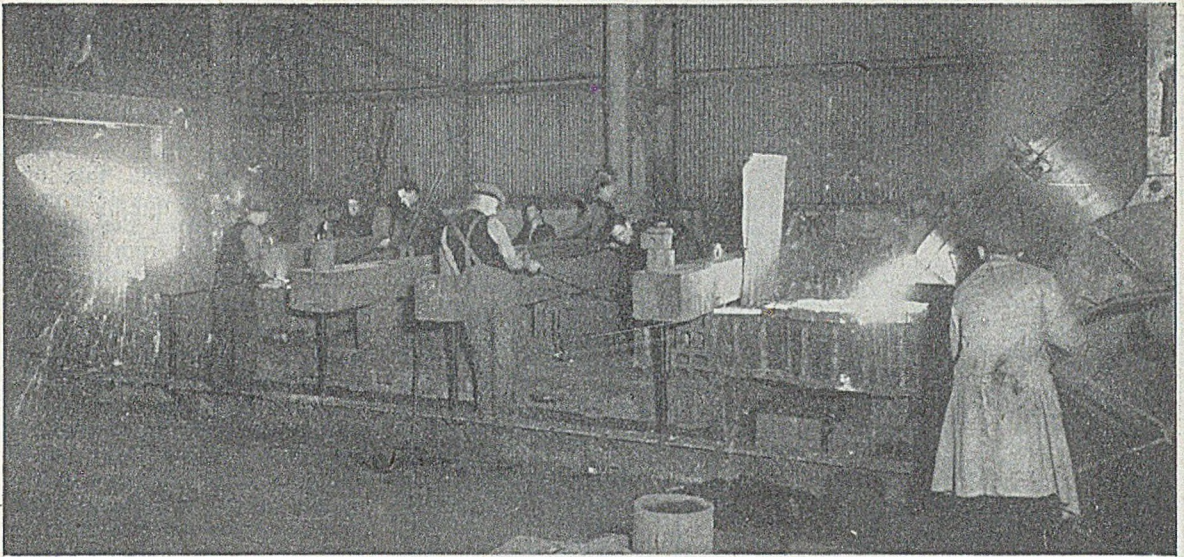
Pouring a Turbine Exhaust Section Casting, using Two Ladles. Mainly, Bottom Gating is used, but Hot Metal is Introduced to the Top Flange at a Late Stage.
